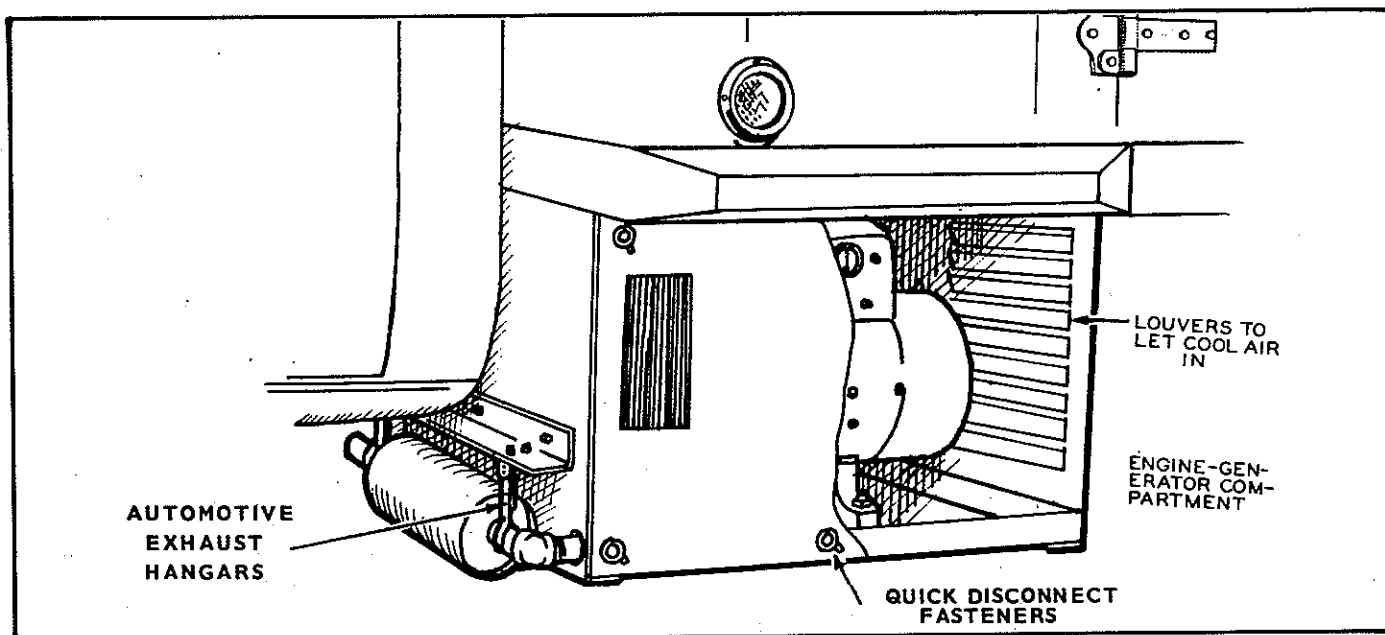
TYPICAL MOBILE INSTALLATION EXHAUST SYSTEM
